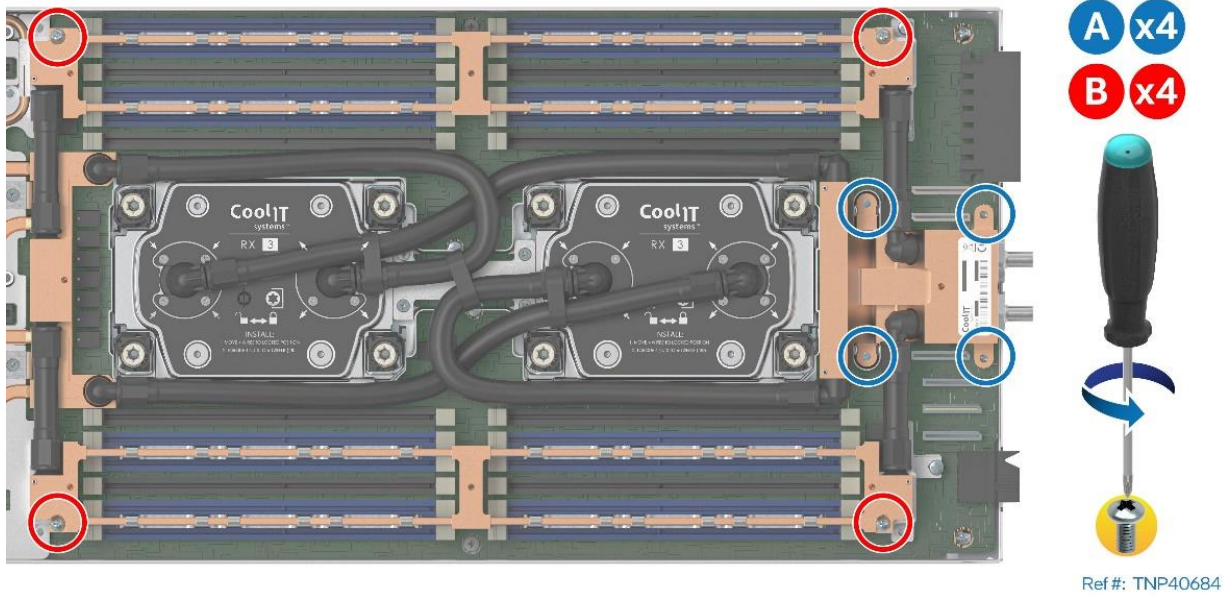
Removing the Screws on Quick Disconnect Block and Memory Cooler
